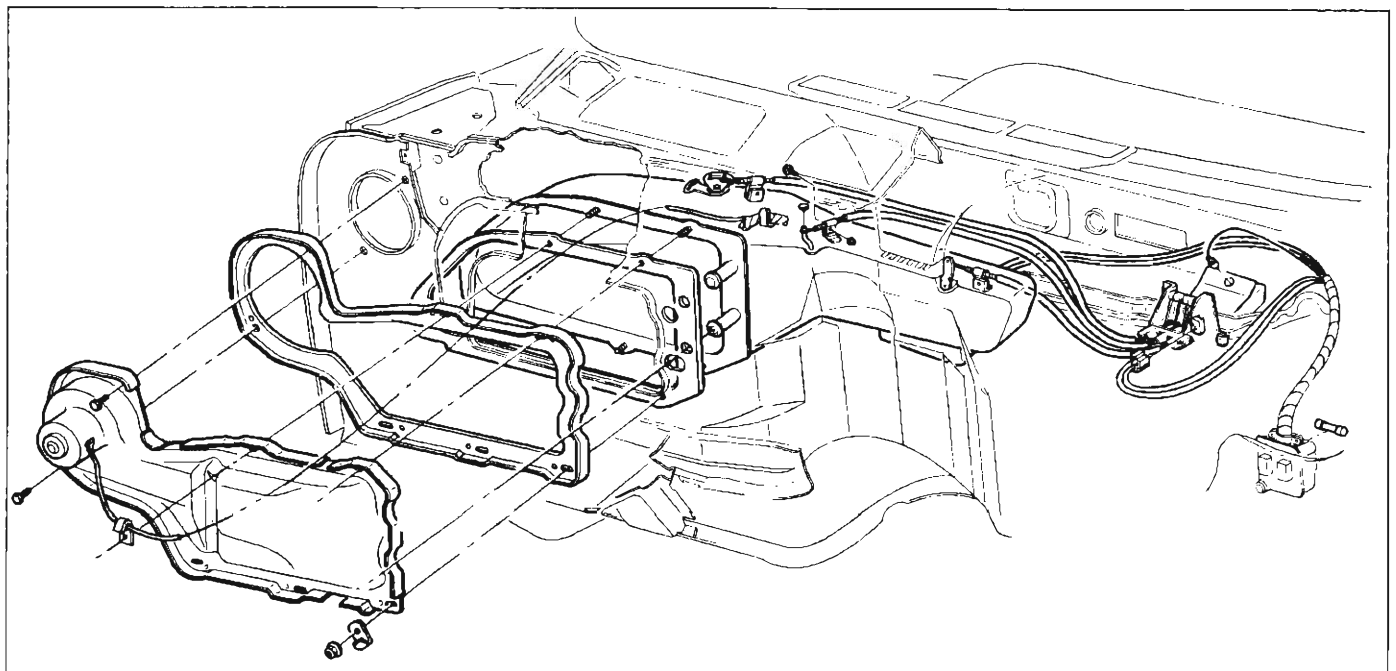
Heater Blower and Air Inlet Assembly and Floor Distributor
